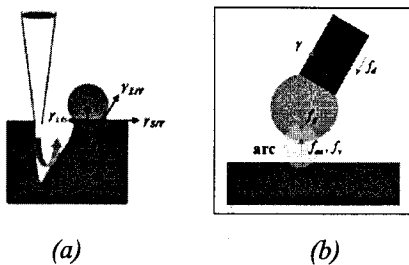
(a): schematic of defects generation of pulsed laser welding, (b): physical model of dip-transfer DC GMA welding for anti-deep transfer
